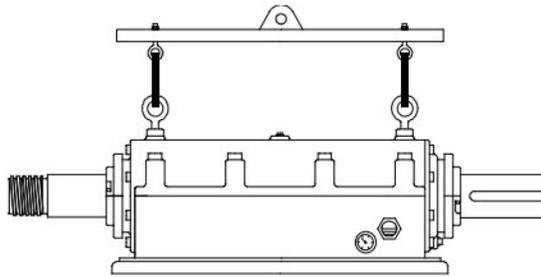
Recommended Lifting Device for Bearing Assembly
